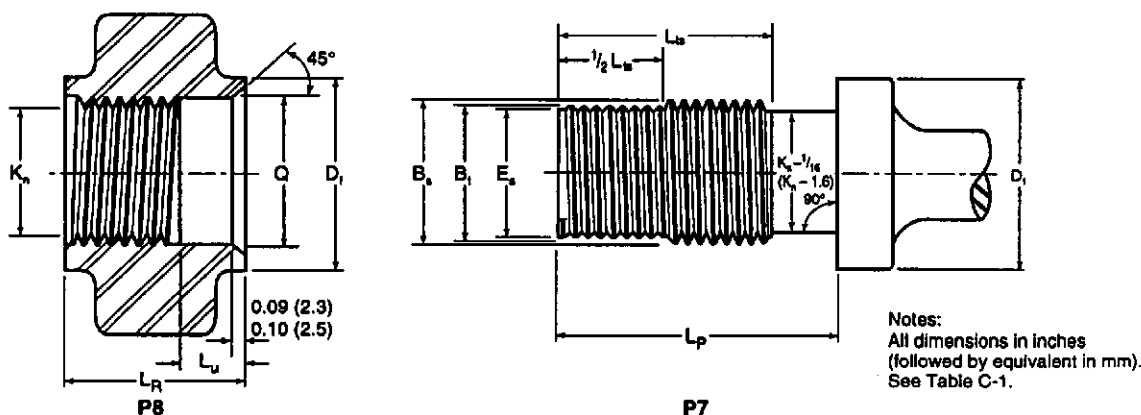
Go Pin-Thread Gauges (For Gauging Sucker Rod Pin Connections)
